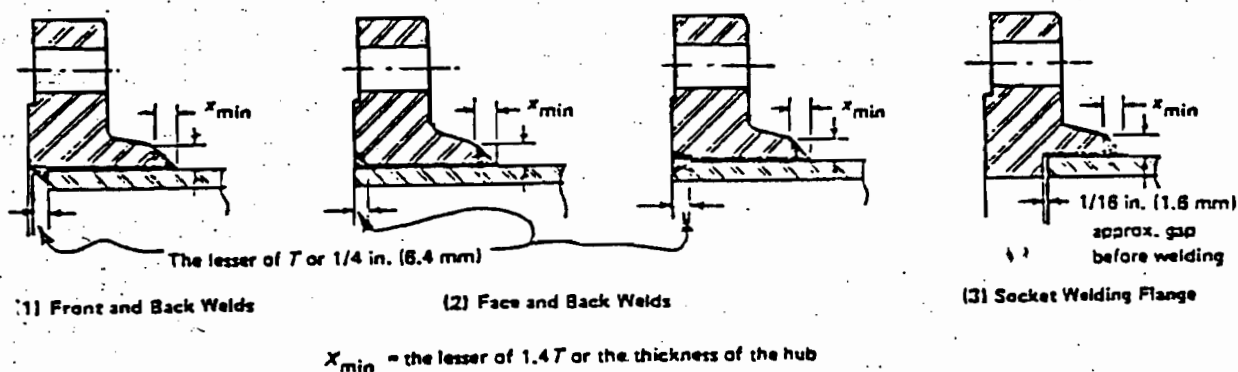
B TYPICAL DETAILS FOR DOUBLE-WELDED SLIP-ON AND SOCKET WELDING FLANGE ATTACHMENT WELDS
